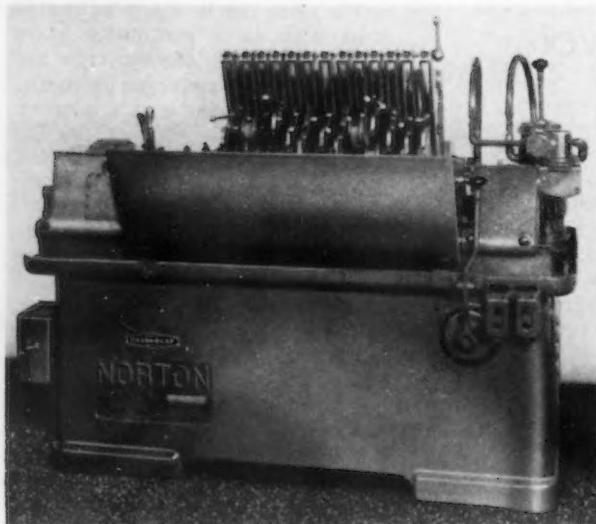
Front view of Crank-O-Lap machine with splash guard in place.
